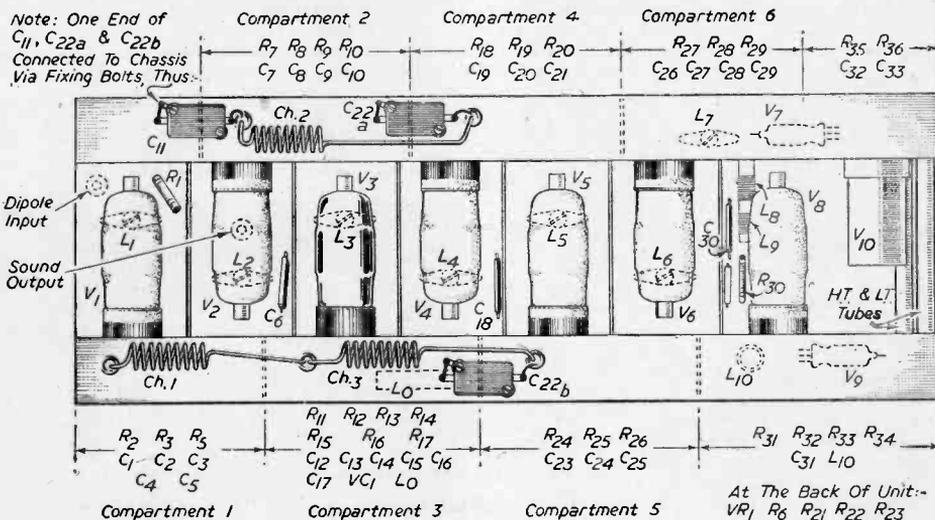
Chassis layout showing components wired in the separate compartments.
